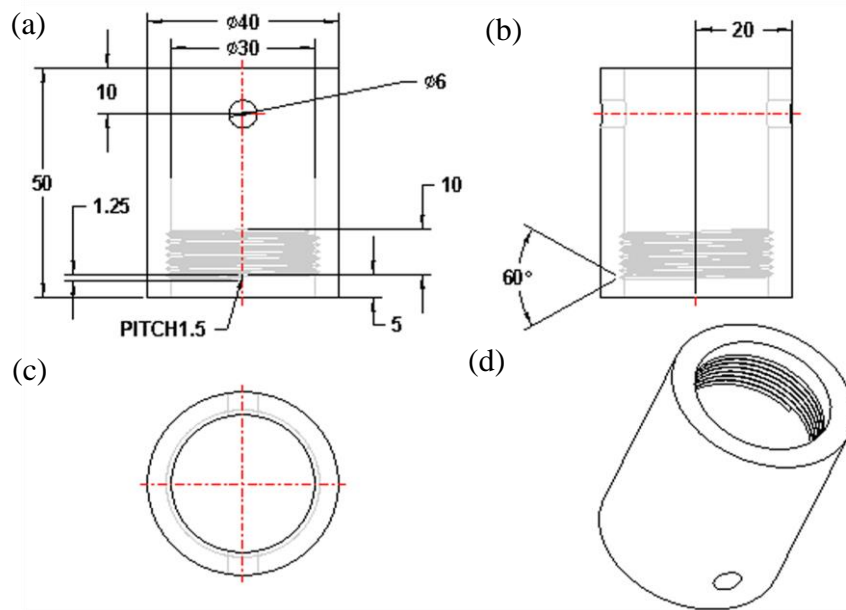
2D drawing of the (a) projected front view, (b) projected side view, (c) projected top view, and (d) three-dimensional CAD model of the CBH type workpiece holder (all dimensions in mm).
